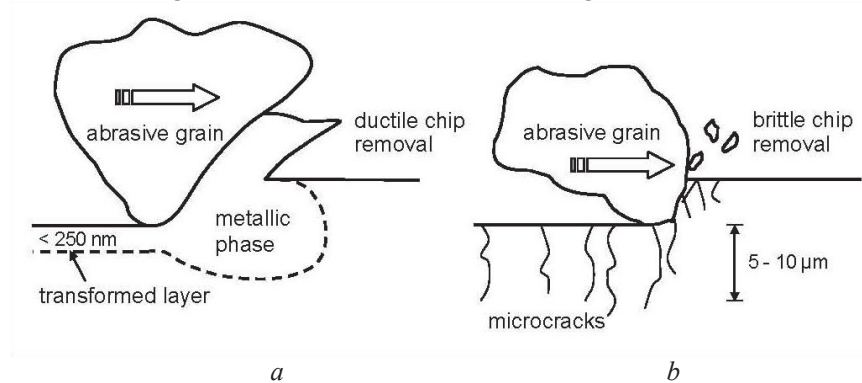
Schematics of the two regimes of abrasive machining; (a) ductile mode removal of material via pressure-induced metallization in the surface layer and (b) brittle fracture [25]
